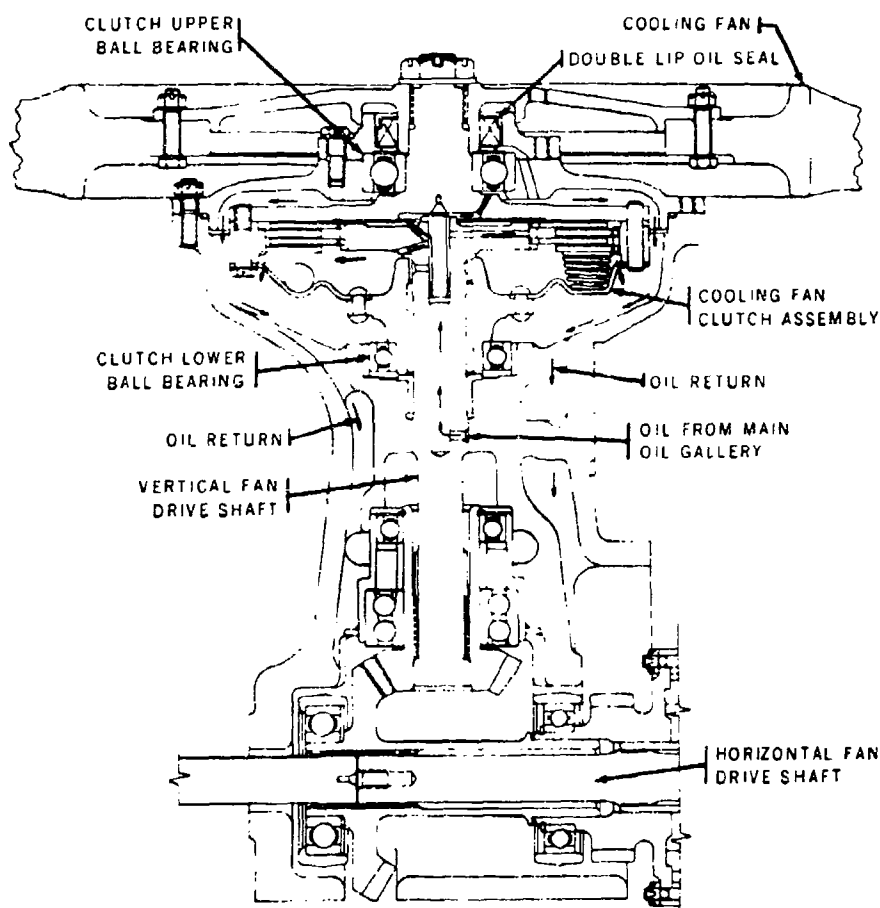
Mechanical Cooling Fan Drive Clutch
